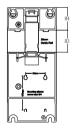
Wall mounting of 4–5.5kW models Table D–1 Wall-mounting dimensions (unit: mm)
